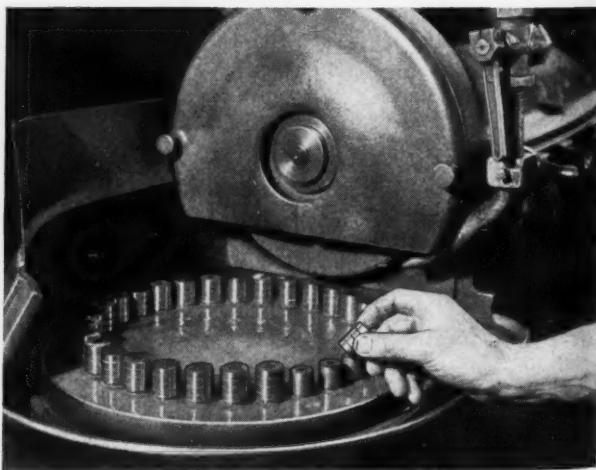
Compressor pistons are finished all over, heads being ground in this Heald surface grinder.
